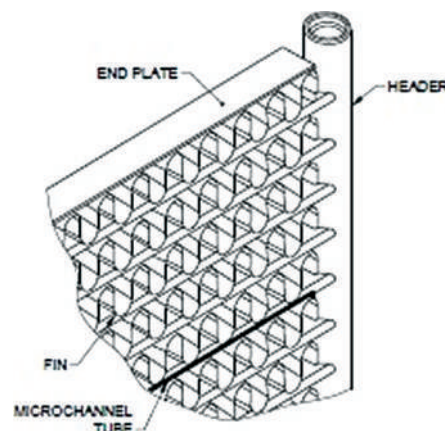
Micro Channel Aluminium Tube and Aluminium Fin Heat Exchanger
